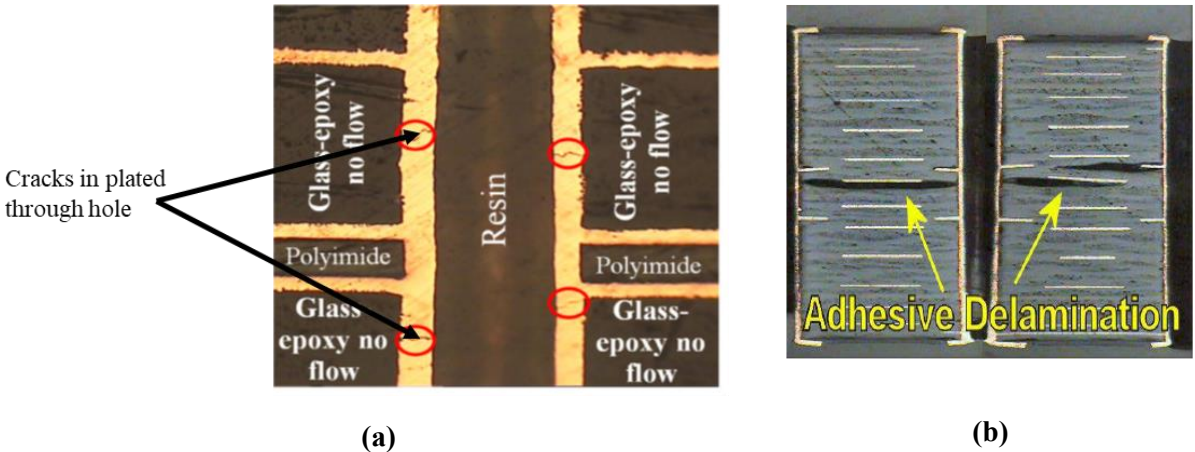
Printed circuit boards (PCB): (a) Cross sections of a plated through hole after thermal cycling [14]. Some cracks are observed in the electrodeposited copper and (b) Delamination between layers in PCB [15].
